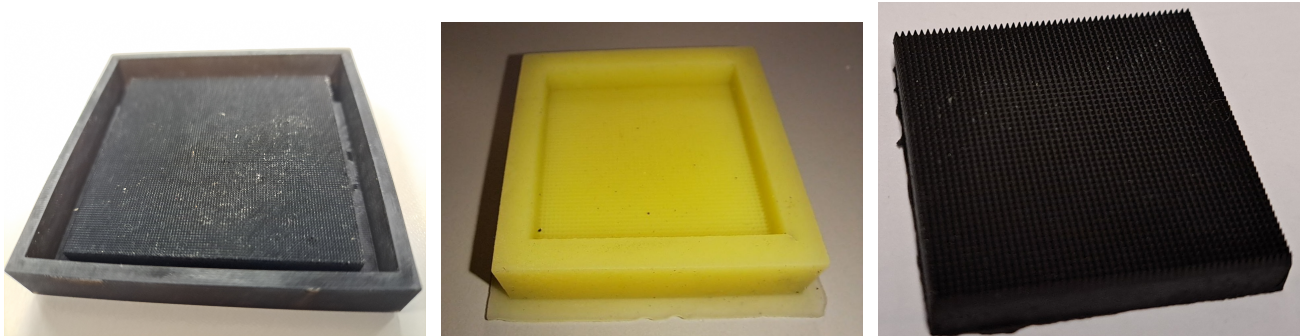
The three stages of the manufacturing process: on the left is the first positive 3D printed master, in the center is the silicone negative mold and on the right is the actual prototype.
